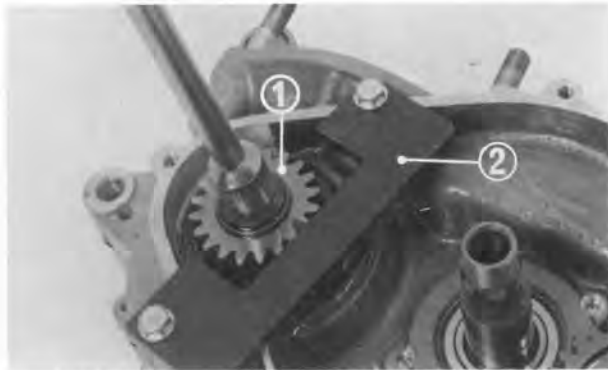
(1) Drive gear (2) Drive gear holder
